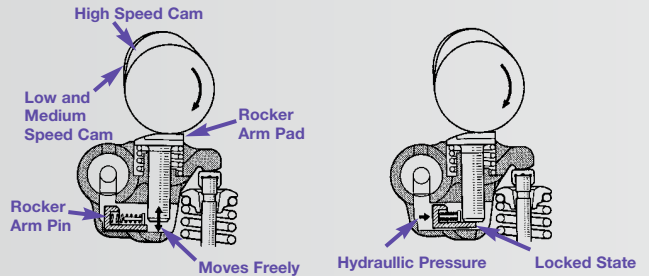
Celica's high-performance 1.8 liter engine has variable valve timing, and, like Honda, variable lift, too. The mechanism is different, but when the oil control valve opens, hydraulic pressure still locks the two intake valves to the high-speed cam, in this case by pushing the spring-loaded pin in the lift assembly as shown.
